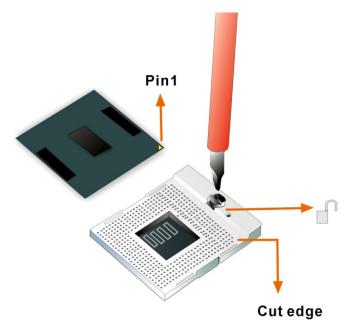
Make sure the CPU socket retention screw is unlocked
